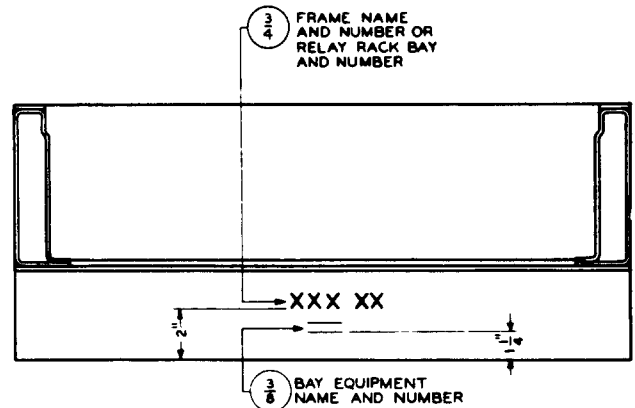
Plan View of Rear of Single-bay, Box-type Frame Base
